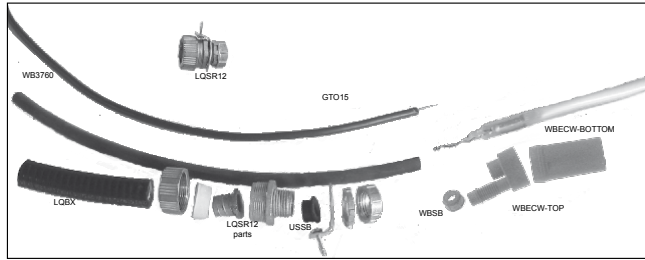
Exploded view of all necessary parts for Electrode to transformer connection when both transformer and sign are in wet locations.
